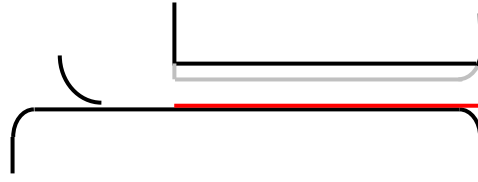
Illustration of the blanket with the spacer inserted. The grey areas represent the removed part of the blanket. The red line is the inserted spacer.
